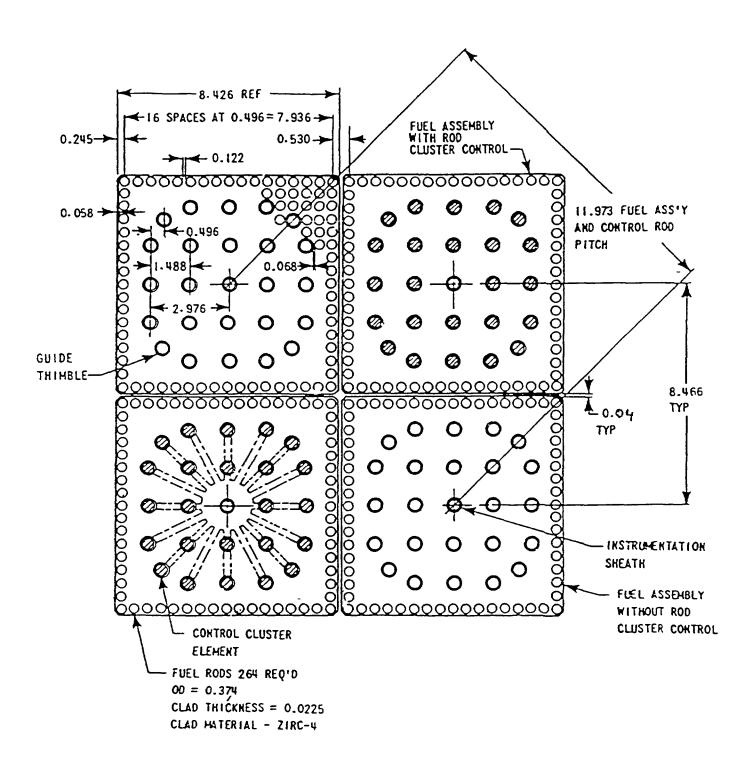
NPP Almaraz II fuel assembly cross-section 17×17 .
